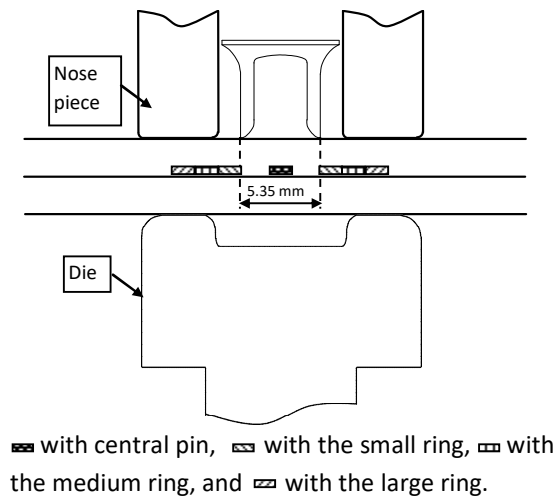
Locations of local impression and surface modification on the bottom surface of the top sheet before rivet inserting.
